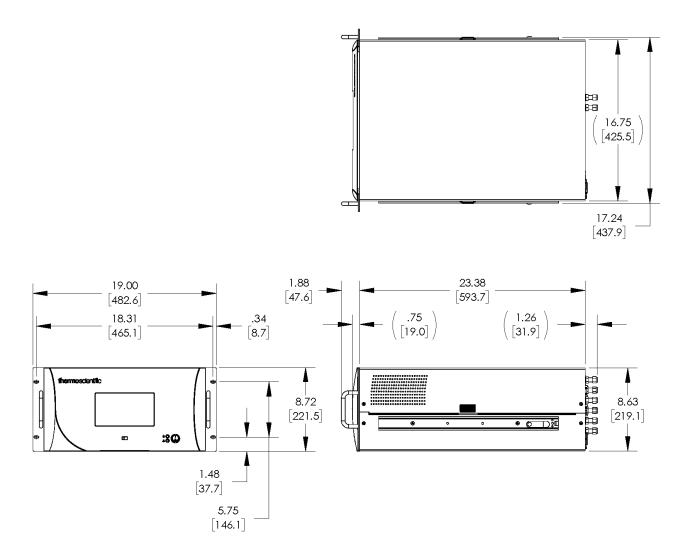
Rack Mount Assembly (dimensions in inches [mm])
